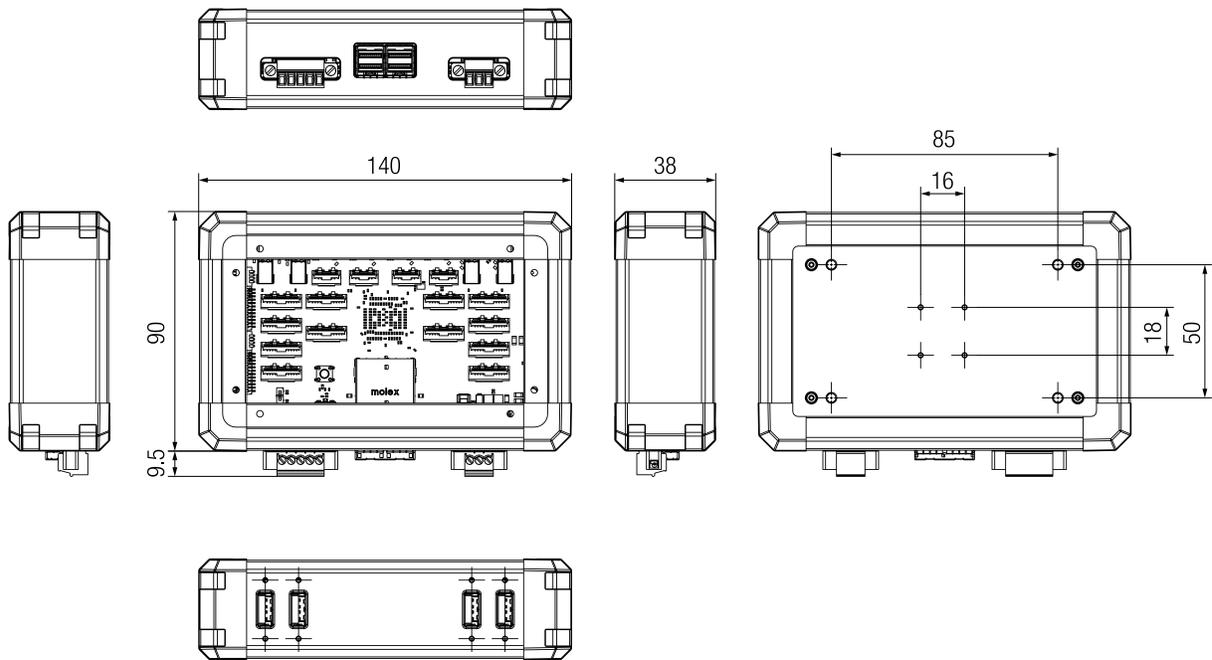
Dimensional drawing of XS-12P-X2G2-X8G3-SFF
